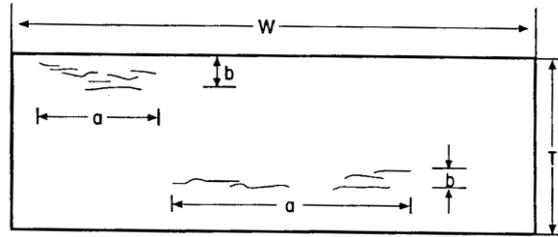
Test specimen and crack dimensions to be used for the calculation of CSR, CLR and CTR [12].
